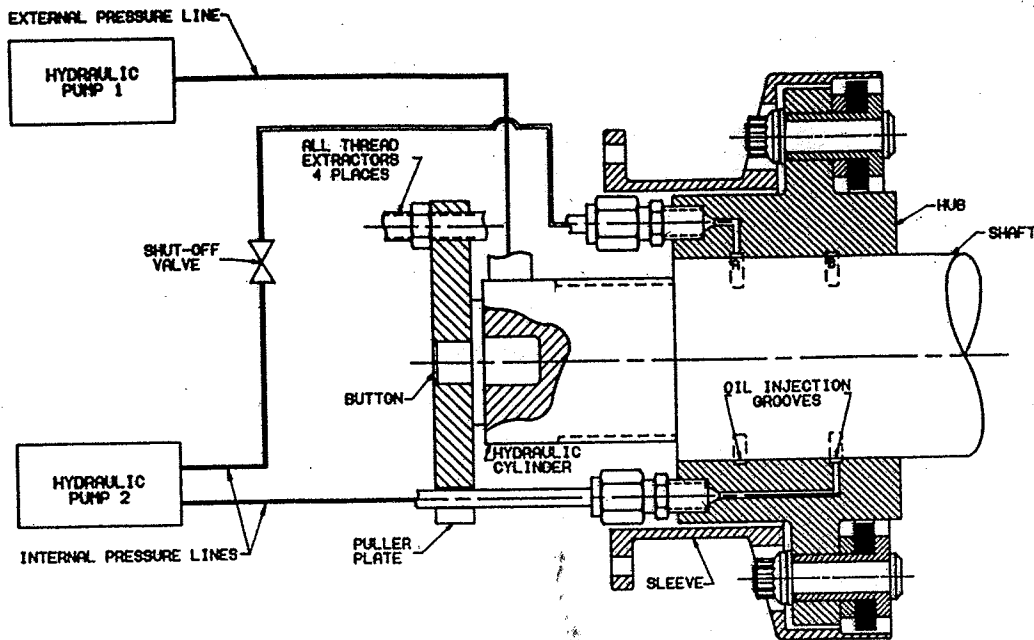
Hydraulic Removal of Keyed Straight Bored Hubs
